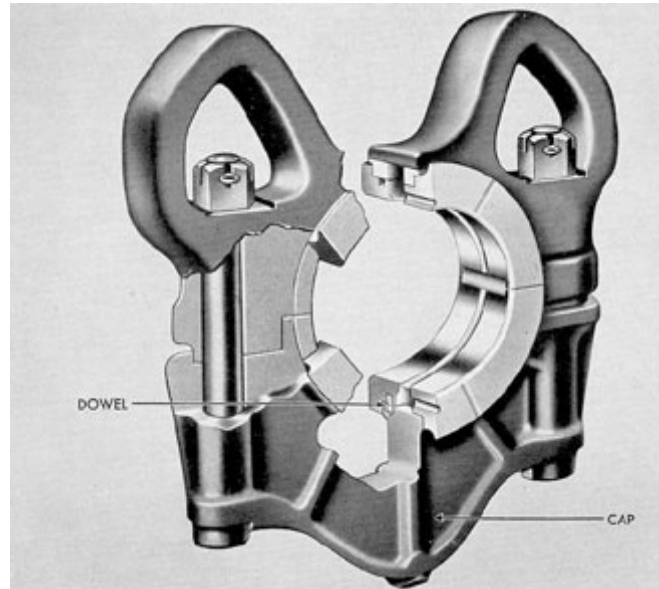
Lower crankshaft thrust bearing, F-M.
